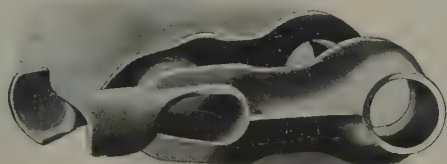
One Hole Jaw for Top Rods—Requires no Welding
